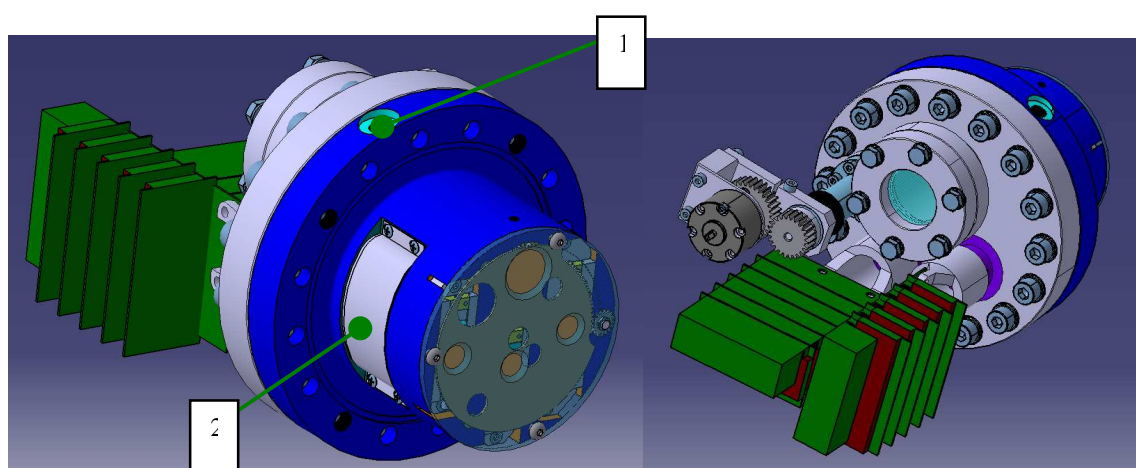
3D view of the assembled port (vacuum side – left picture, atmospheric side – right picture, 1-Cooling channel inlet, 2- Mounting hole)
